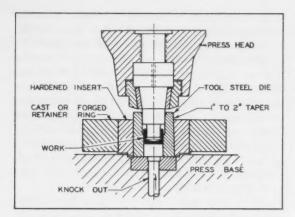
Tooling assembly for the backward extrusion process. The retainer ring is shrunk over the hardened insert to provide an initial compression load on the internal member.
